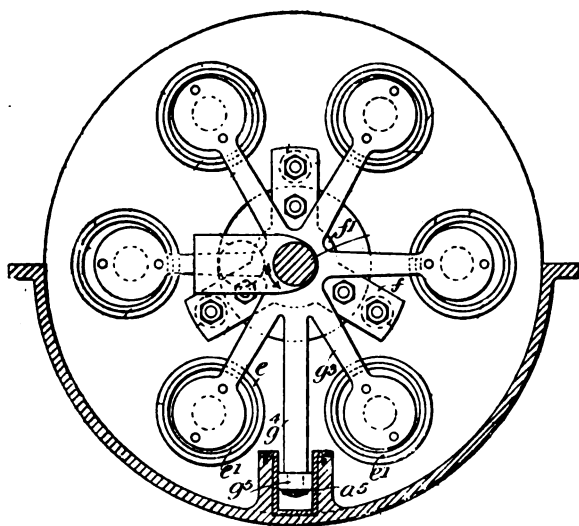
Cross sectional view of Lége Motor, showing arrangement of cylinders.
